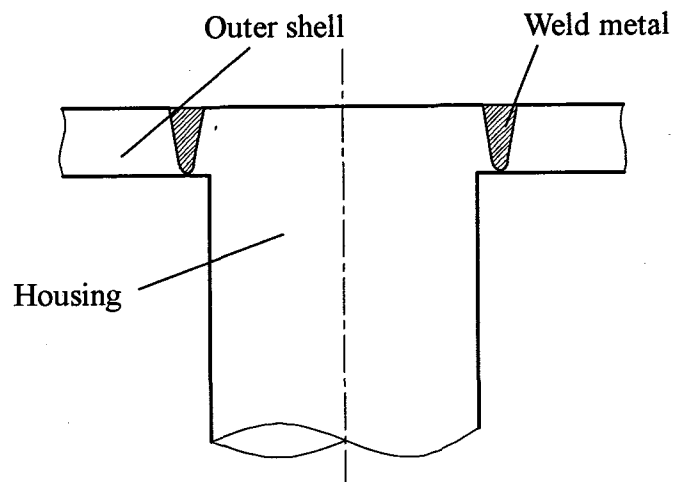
Butt Weld between Outer shell and Housing
